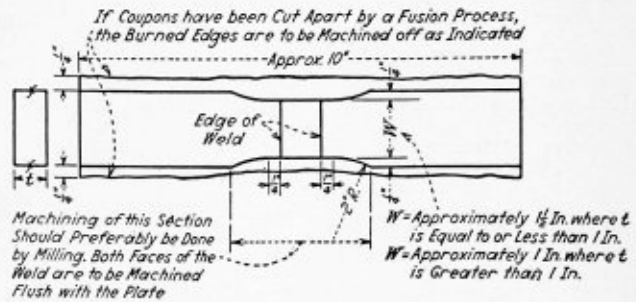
WELD-METAL TENSILE-TEST SPECIMEN
